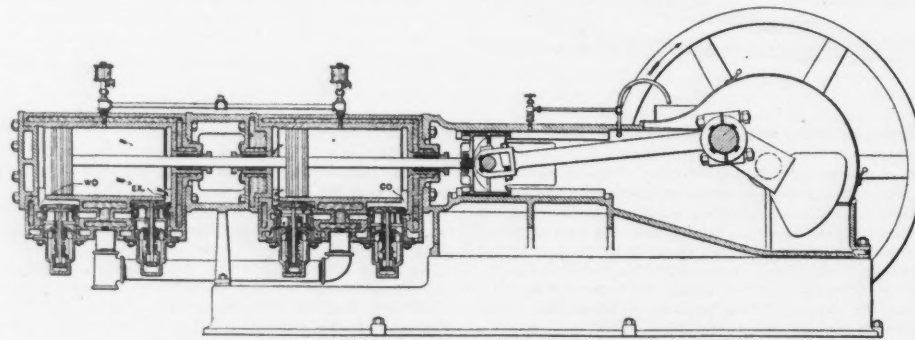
LONGITUDINAL SECTION OF 75-HP. GAS ENGINE.
